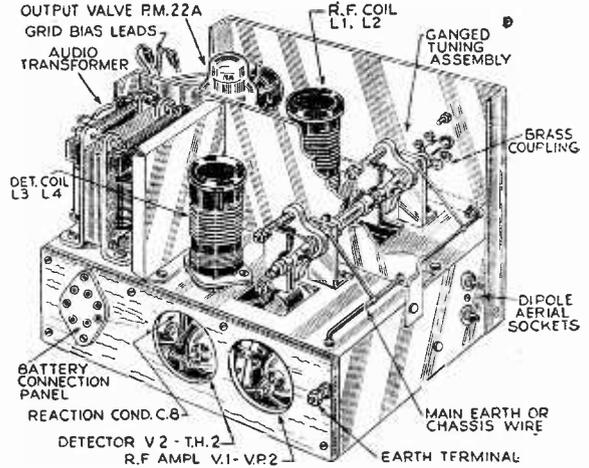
Pictorial view of the completed receiver. The photograph on the cover shows the under view of the set.
